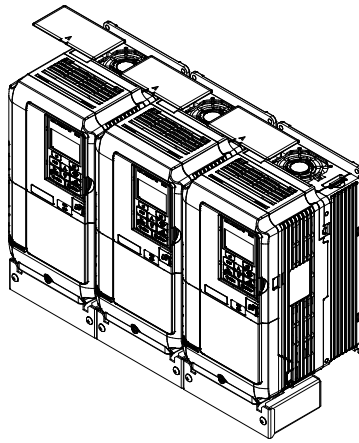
IP20/NEMA 1 Side-by-Side Mounting in Enclosure
